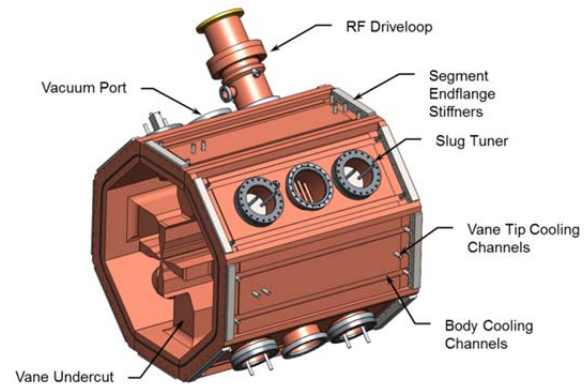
RFQ assembly view of segment 1 with endplate removed.
